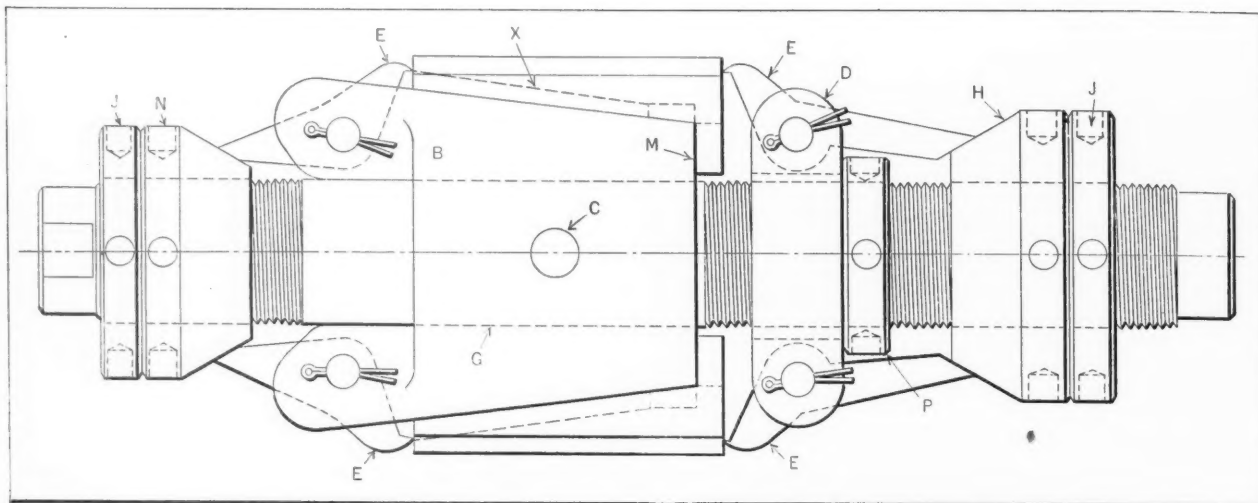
Arbor which can be Adjusted for Turning Cross-head Shoes of Different Sizes
